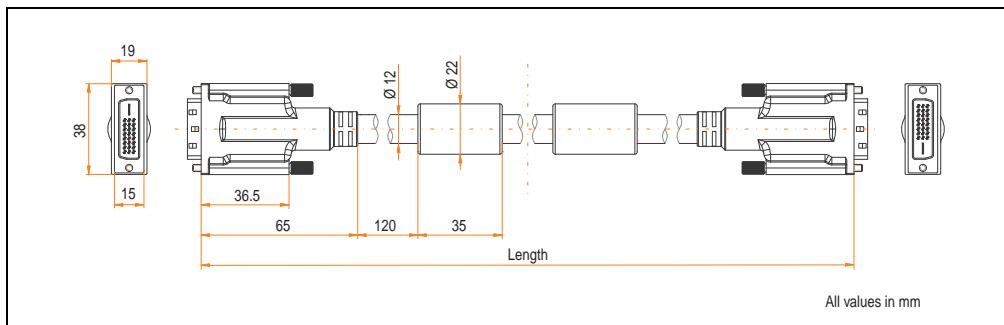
Dimensions - SDL cable 5CSDL.0xx-03
